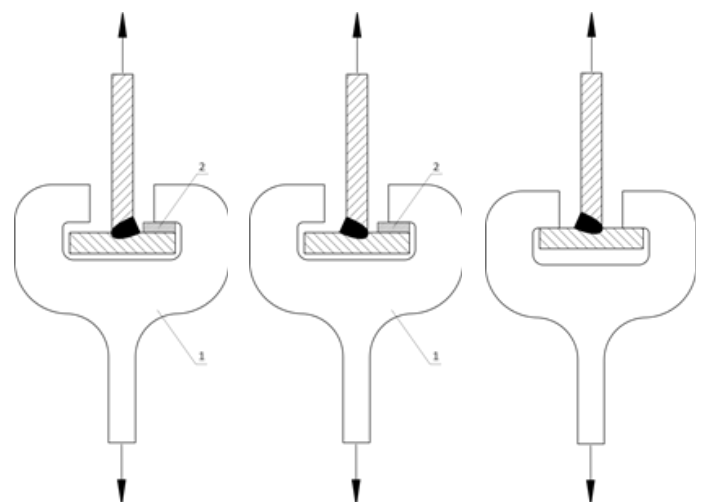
Schematic diagram presenting the rupture tests of the T-joints made using the deep-penetration process: a) with the simultaneous tension of the weld face, b) with the simultaneous tension of the weld root and c) with the symmetric tension of the weld face and root
